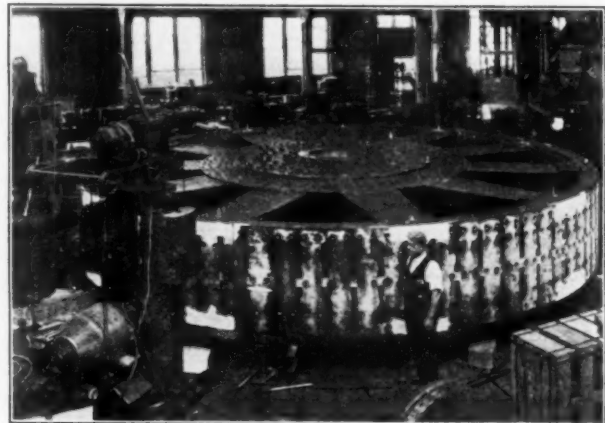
ASSEMBLY OF HUB, SPIDER, AND RIM
